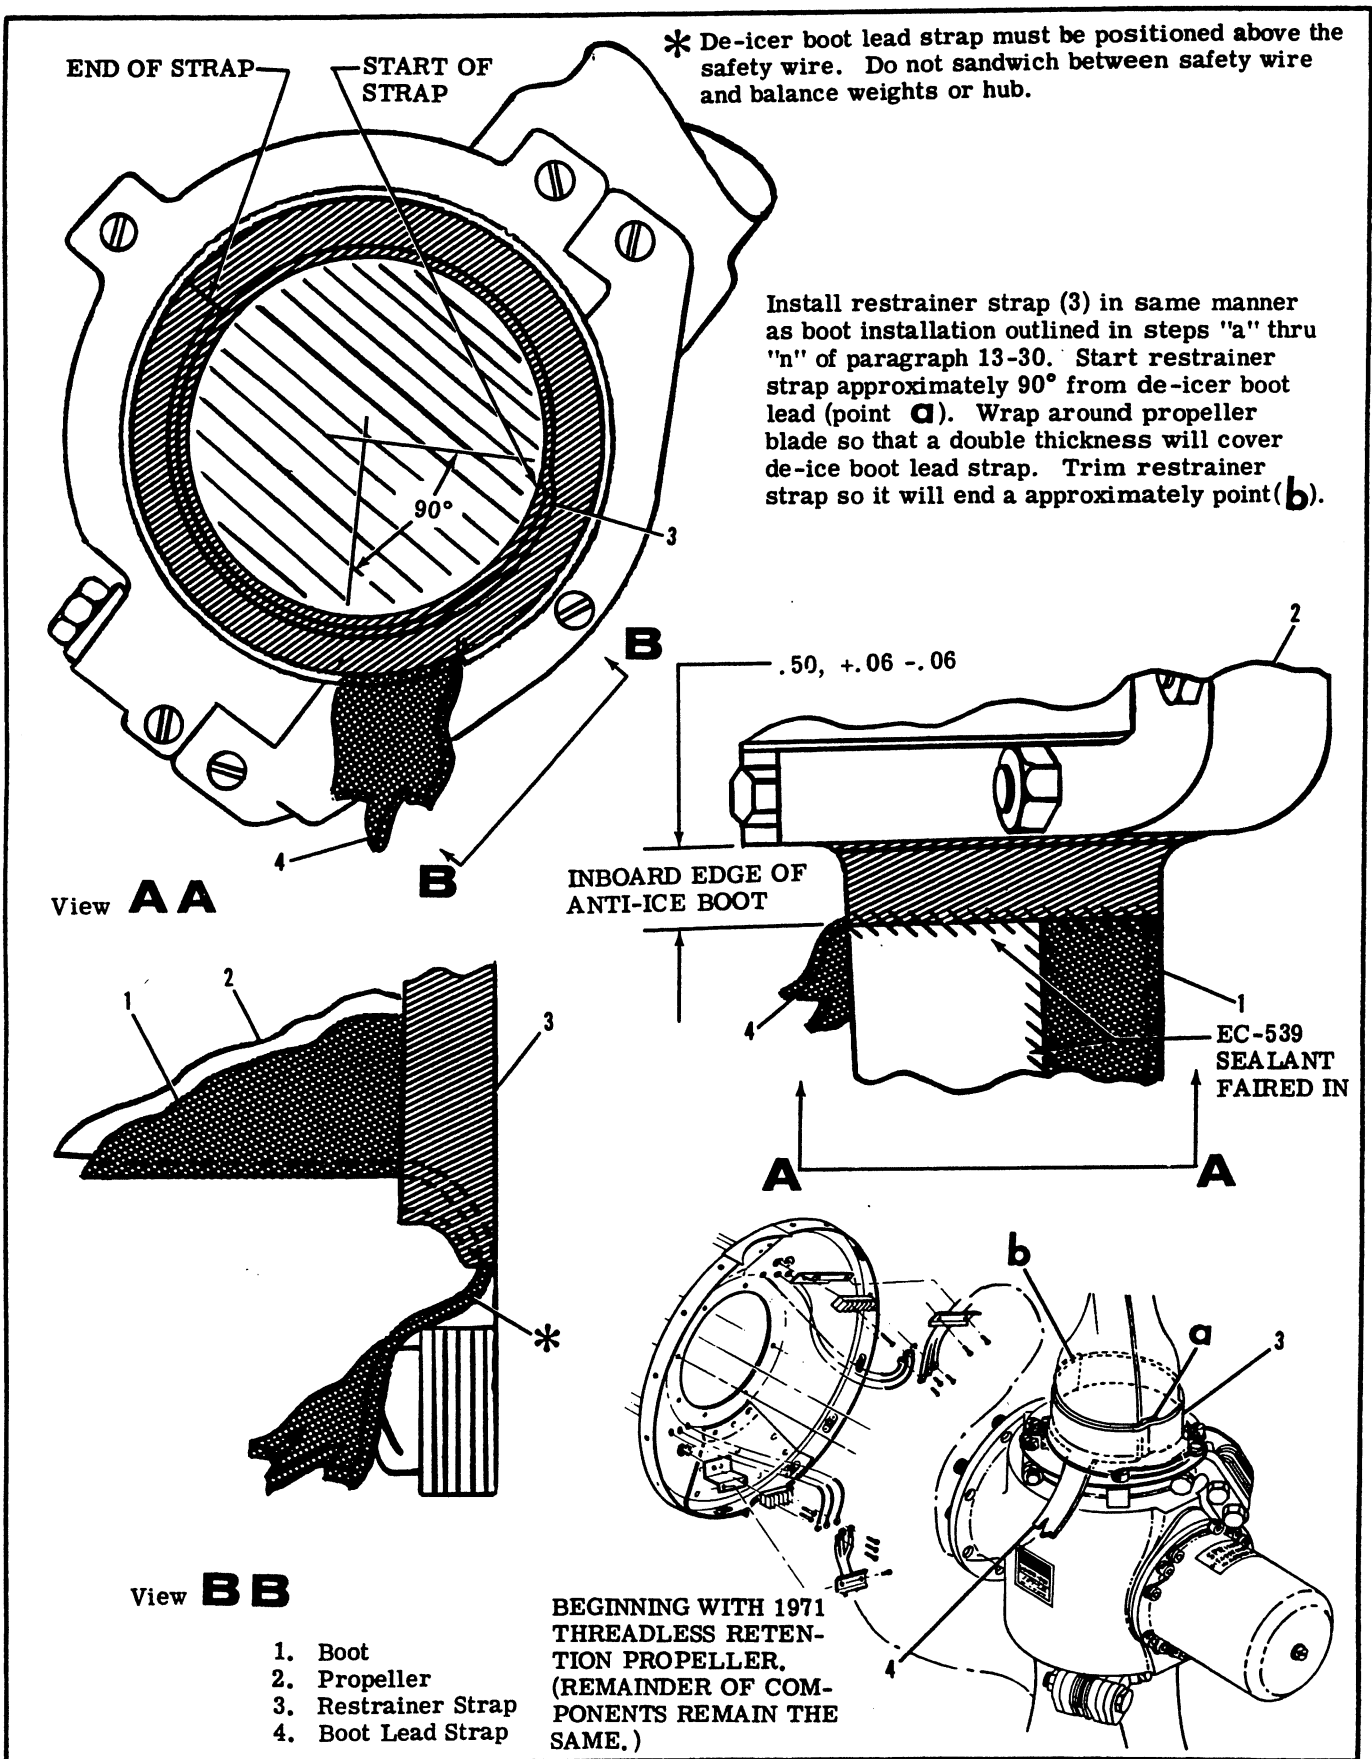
Propeller Anti-Ice System (Sheet 2 of 2)
